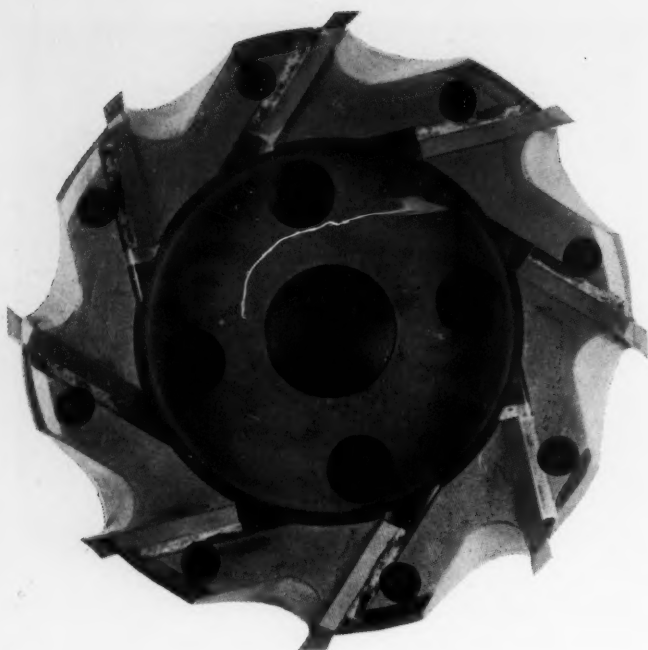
Modern 8-in. milling cutter for machining light metals and mild steel.
